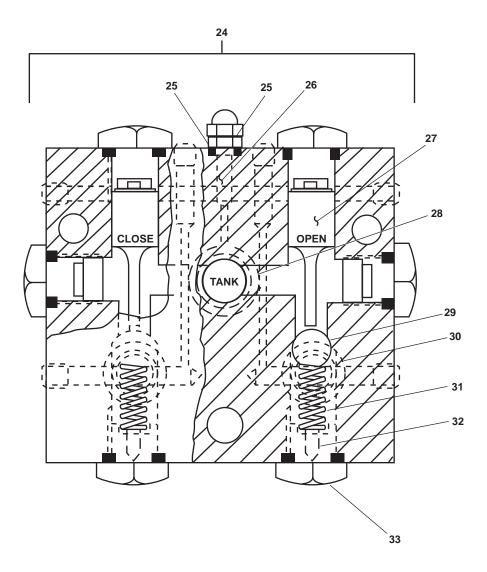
Hydraulic Watertight Doors (Sheet 6 of 9)
